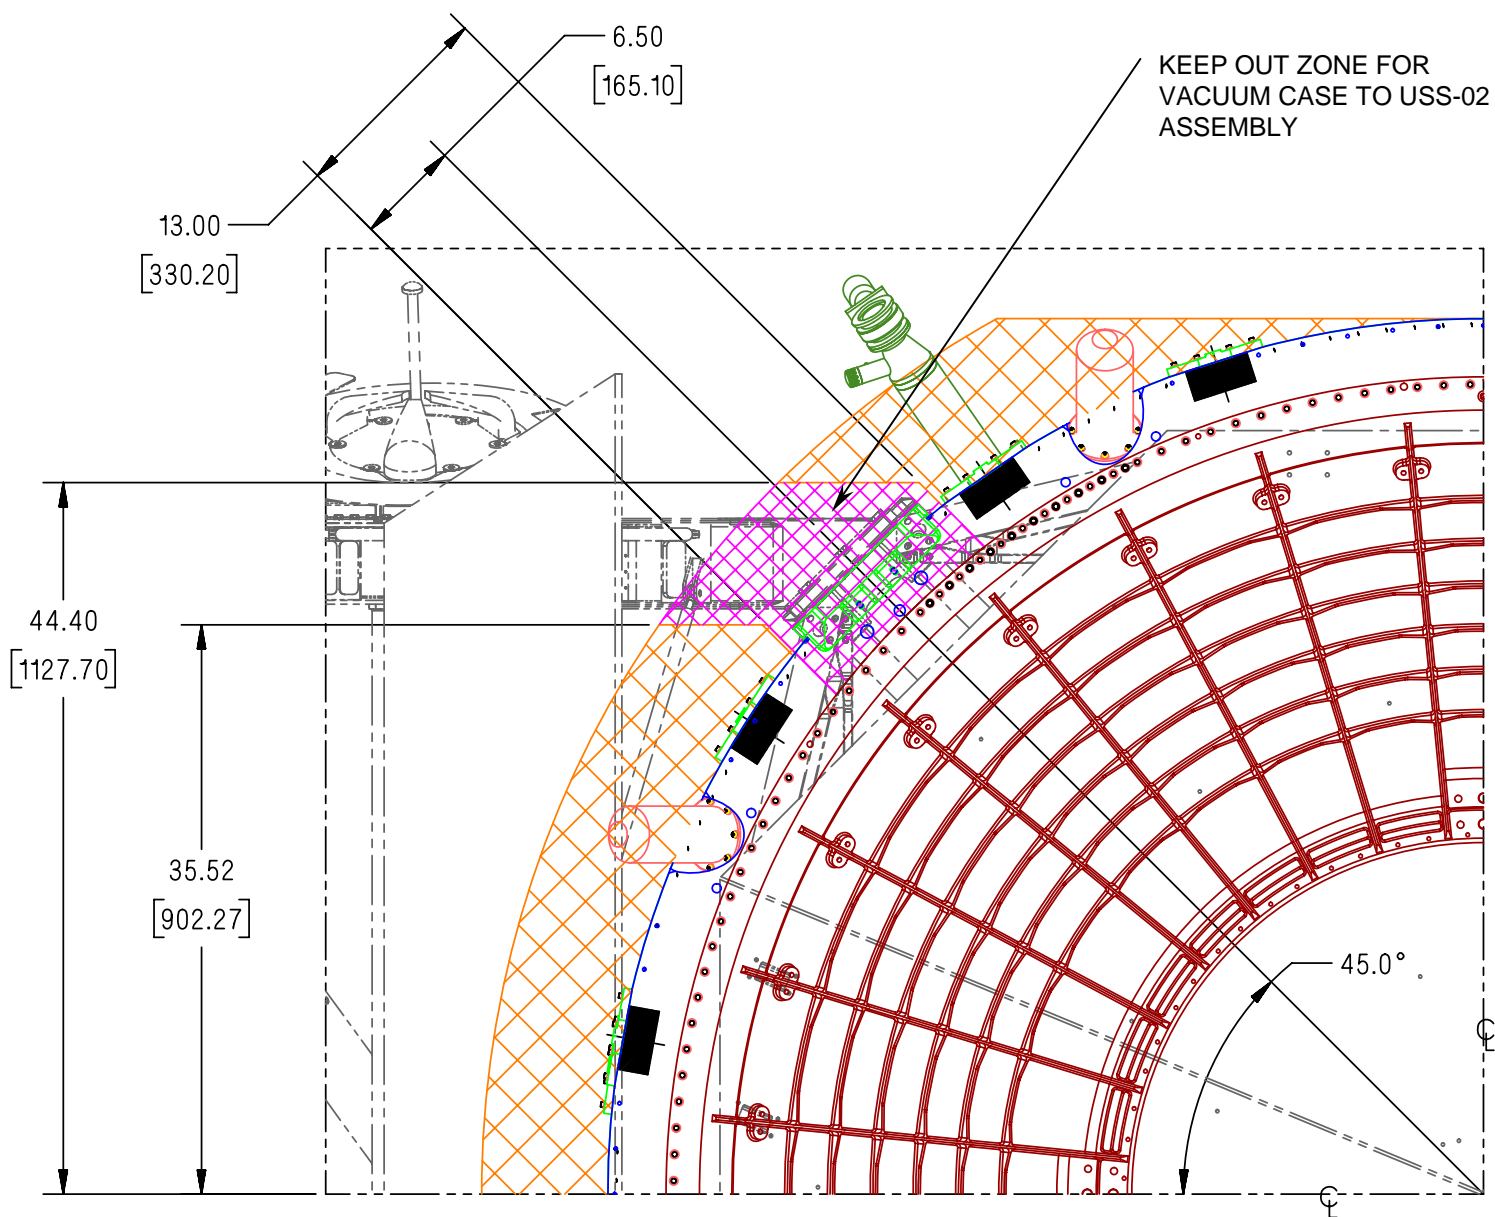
Detail View of the Keep Out Zone for the VC/USS-02 Assembly
